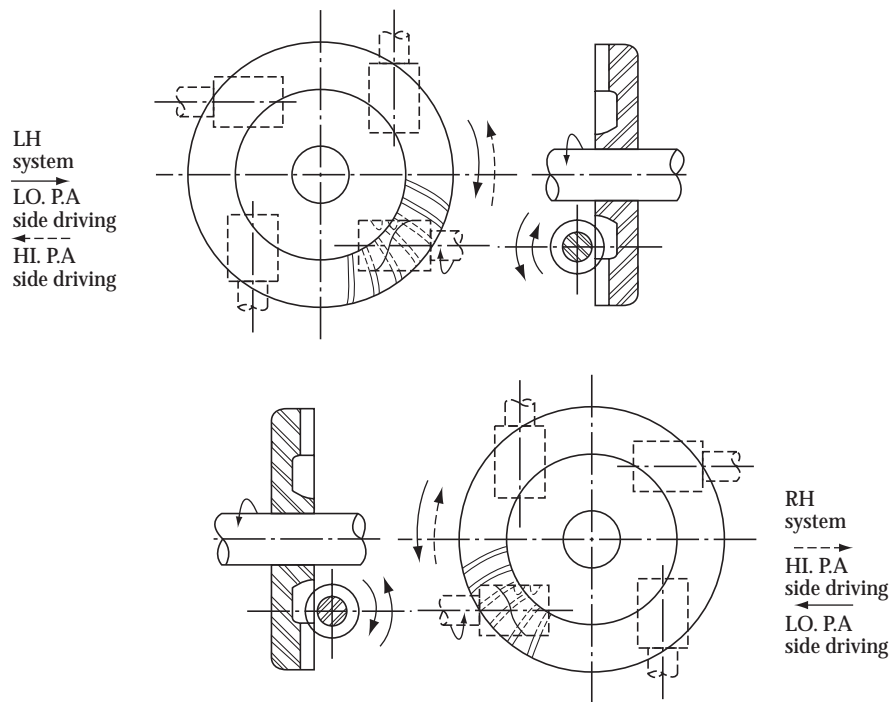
Examples of mounting positions for LH and RH Helicon gearsets.
